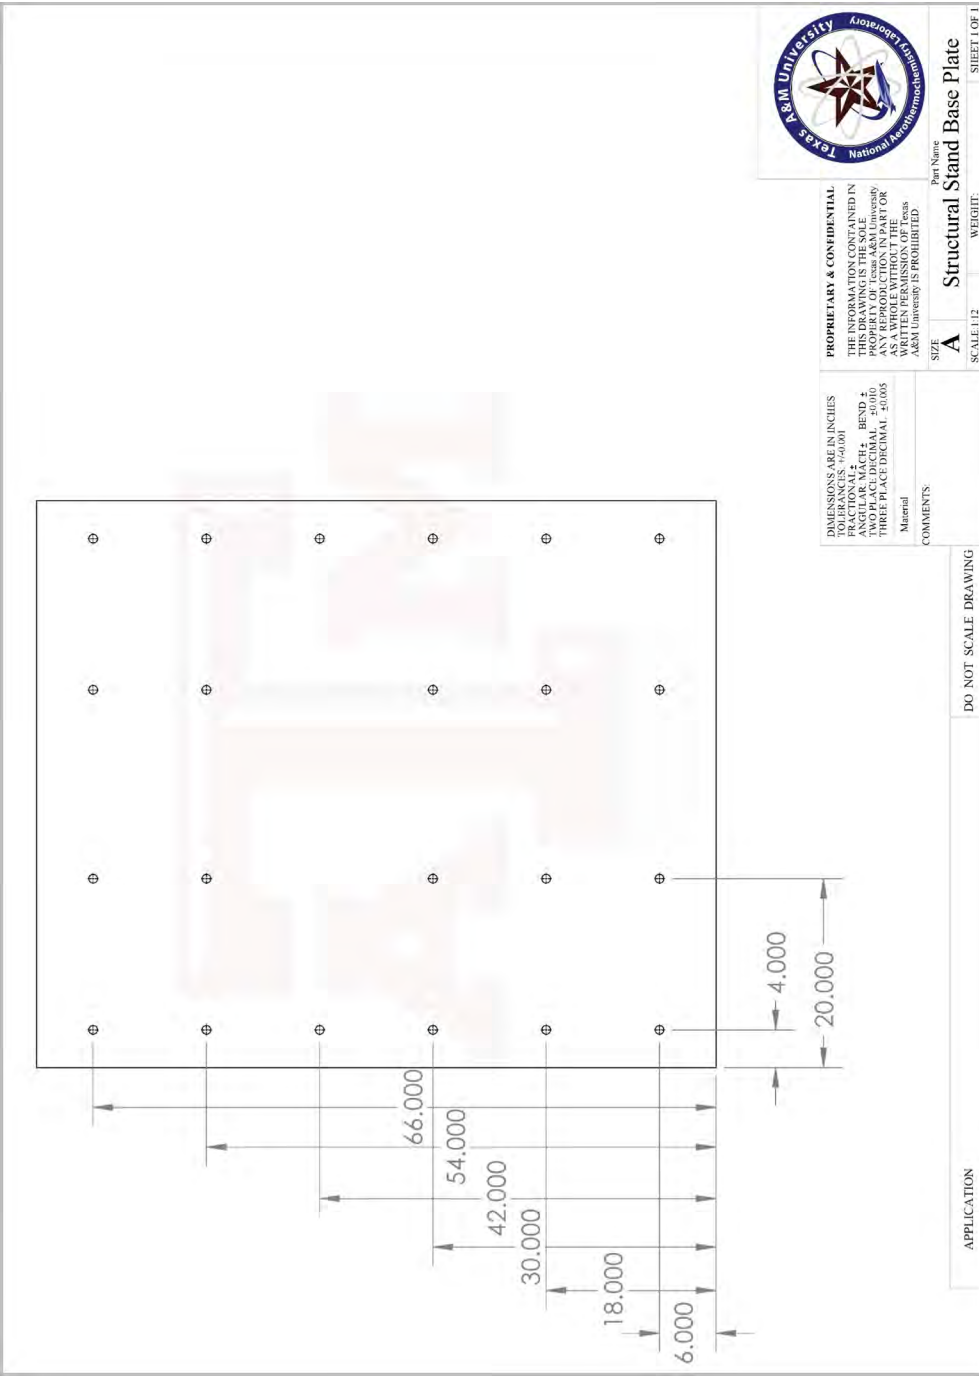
DIMENSIONAL DRAWING FOR SECONDARY STAND BASEPLATE WITH 3/4-IN FREE CLEAR HOLES THAT ARE TORCHED INTO THE PLATE.
